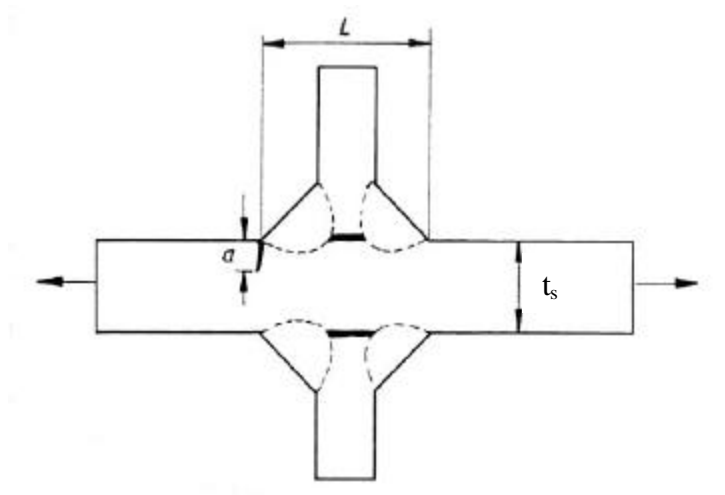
Weld Toe Crack at Cruciform Joint with Partial Penetration Fillet Welds
